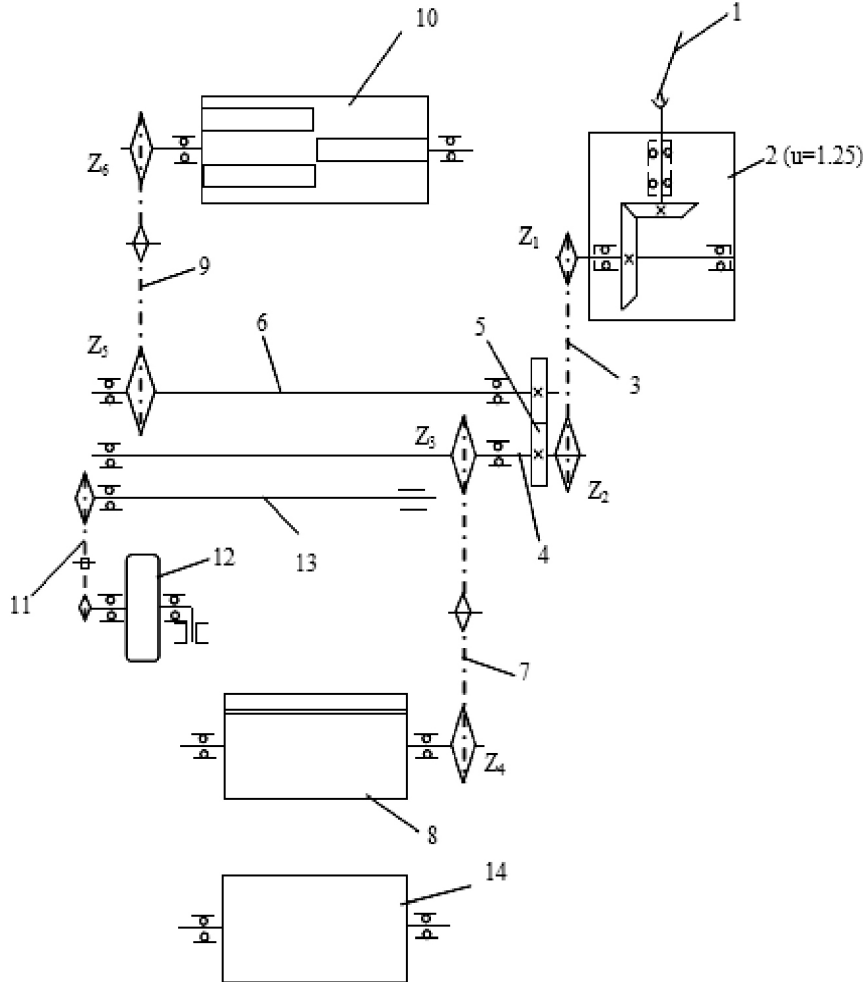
The kinematic scheme of the combined unit: 1 – kardan; 2 – conic reducer; 3, 7, 9, 11 – chain drivers; 4, 6 – shaft; 5 – cylindrical gear wheel; 8 – winging drum; 10 – milling drum; 12 – basic wheel; 13 – shaft of the bobbin sowing device; 14 – skating rink
